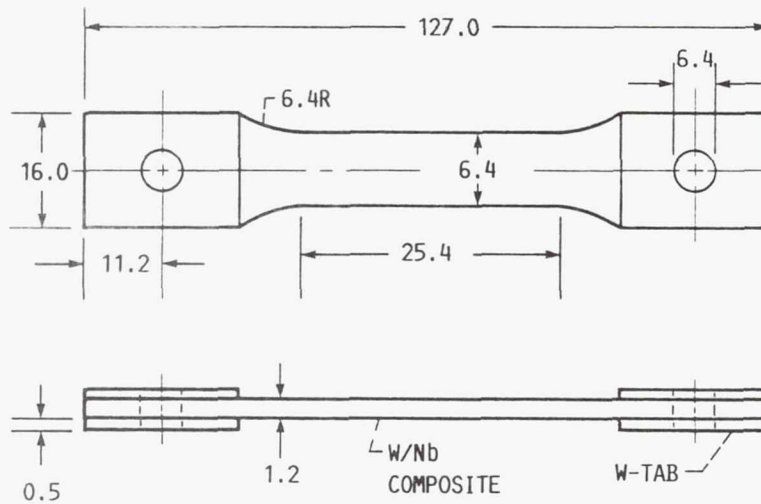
SHEET SPECIMENS USED FOR TENSILE TESTING OF COMPOSITE PANELS AND ARC-SPRAYED SHEET. DIMENSIONS IN MM.
